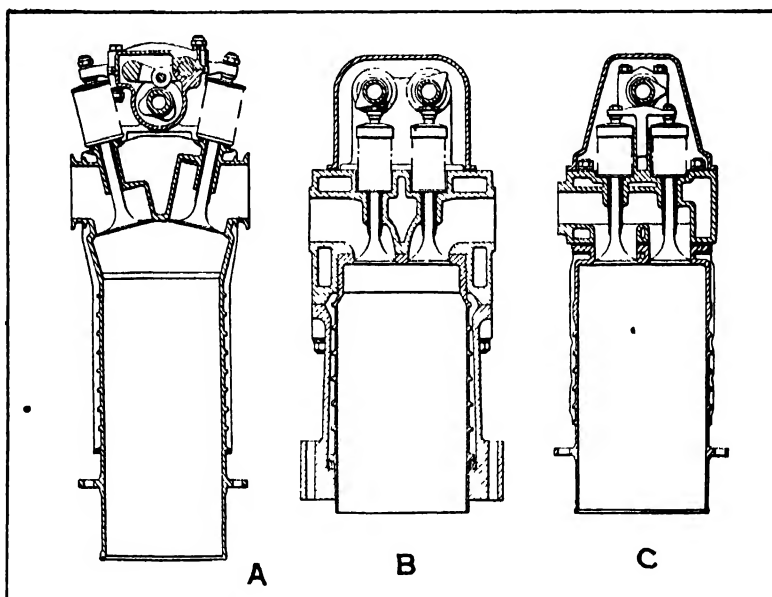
Forms of Cylinders Used in Practical Water-Cooled Aircraft Engines. A—Cylinder of Liberty Engine. B—Curtiss Wet Sleeve Construction. C—Packard Cylinder Construction.
